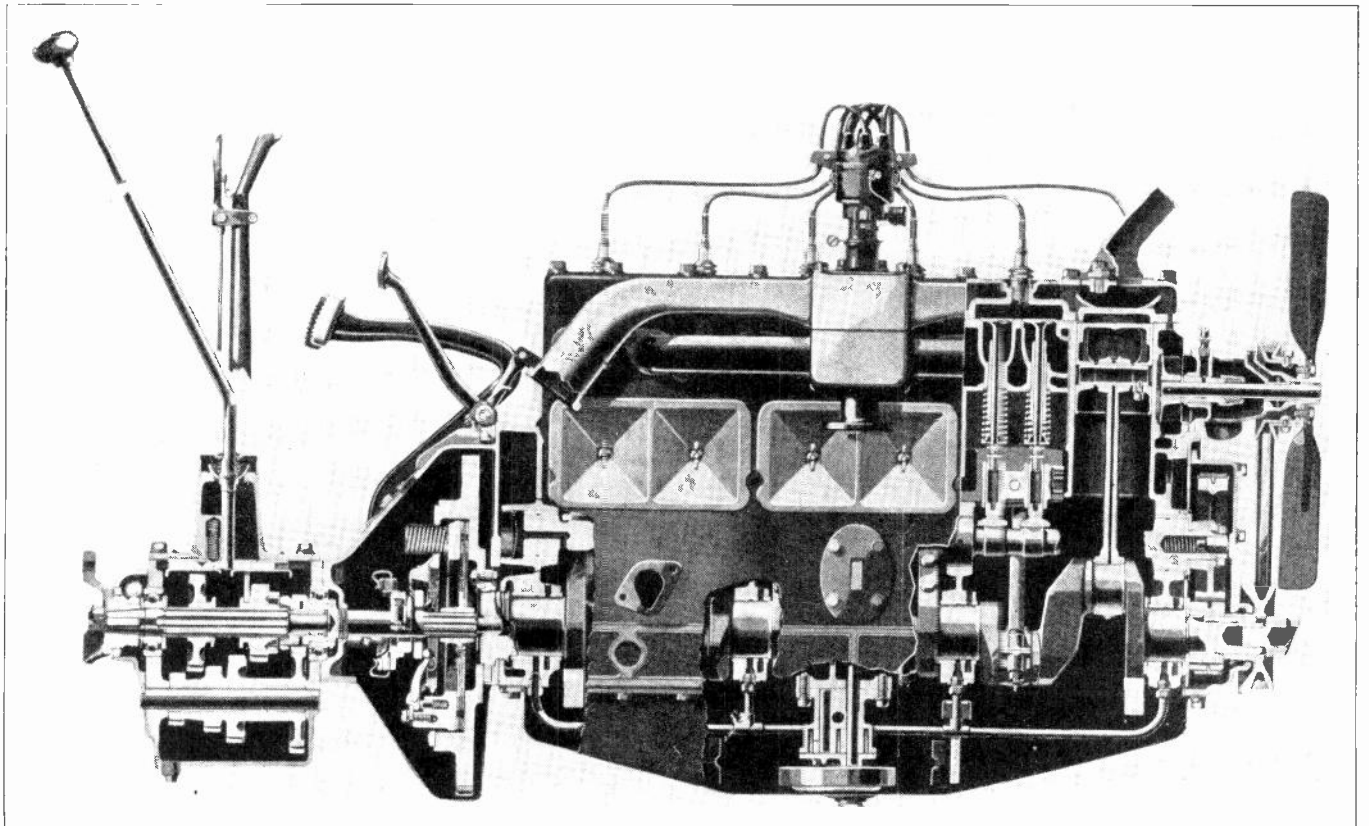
An excellent side sectional view of a six-cylinder Oldsmobile engine cut away to show the crank shaft, pistons, connecting rods, valves, push rods, cam shaft, flywheel, clutch and transmission. Also note the position of the distributor and spark plugs on top of the engine. Courtesy Oldsmobile Mfg. Co.
